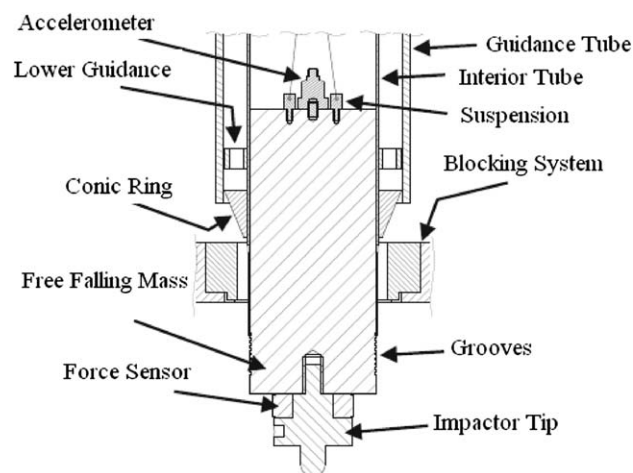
Detailed cutaway of the drop assembly, the guidance tube and the blocking system.
